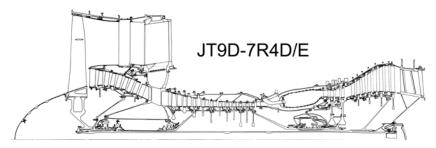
Pratt & Whitney JT9D-7R4 Cutaway
